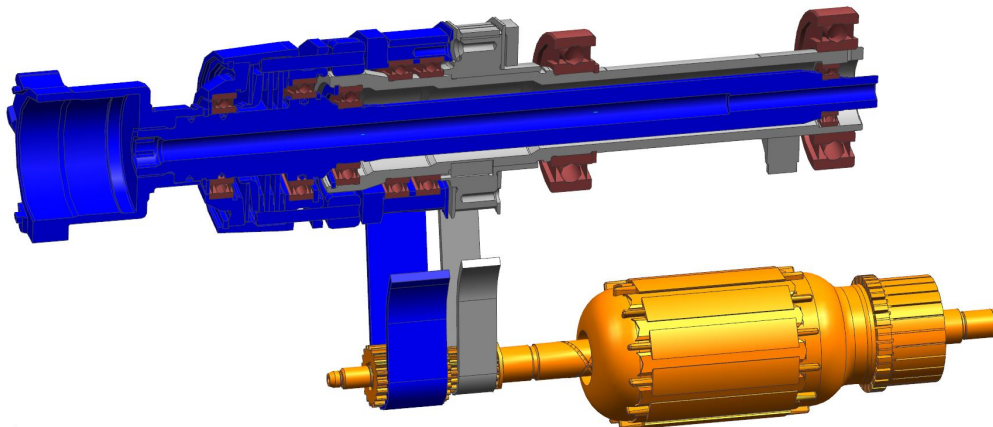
Sectional CAD-view of the rotating assembly groups (color according to rotational speed)
